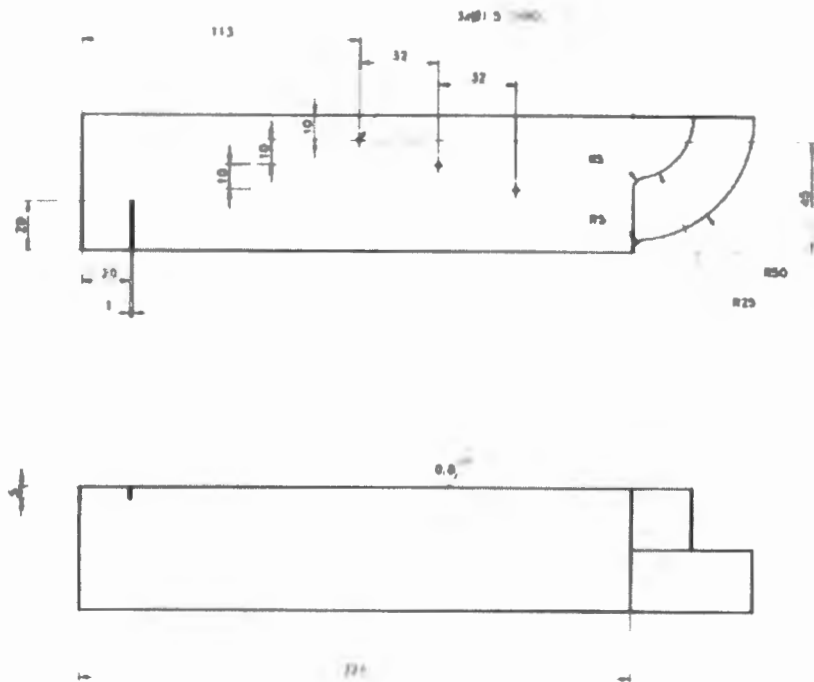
PA- CALIBRATION BLOCK SAMPLE DIMENSIONS
